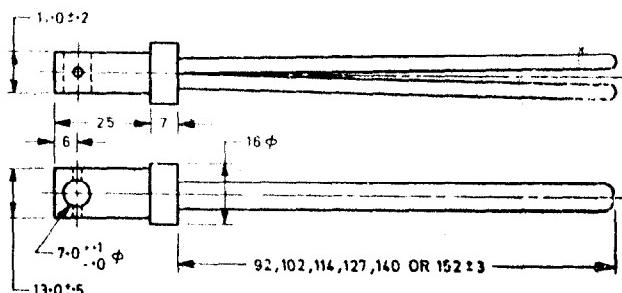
A TYPICAL TWEEZER COLLARED TONGUE
